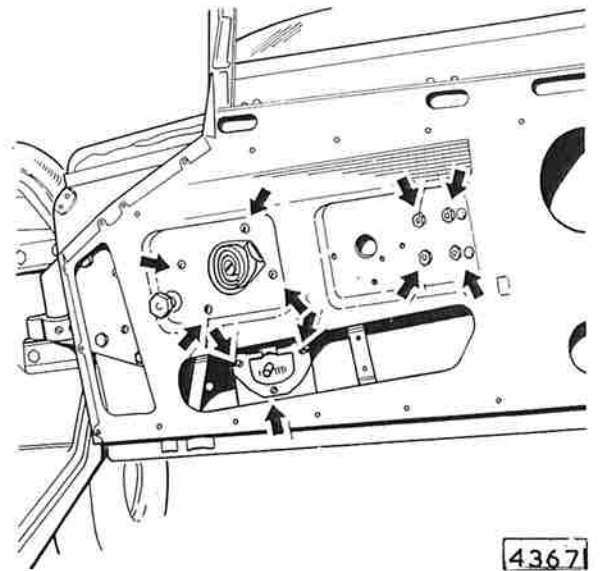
Location of the screws and nuts securing the window regulator to the door panel.
